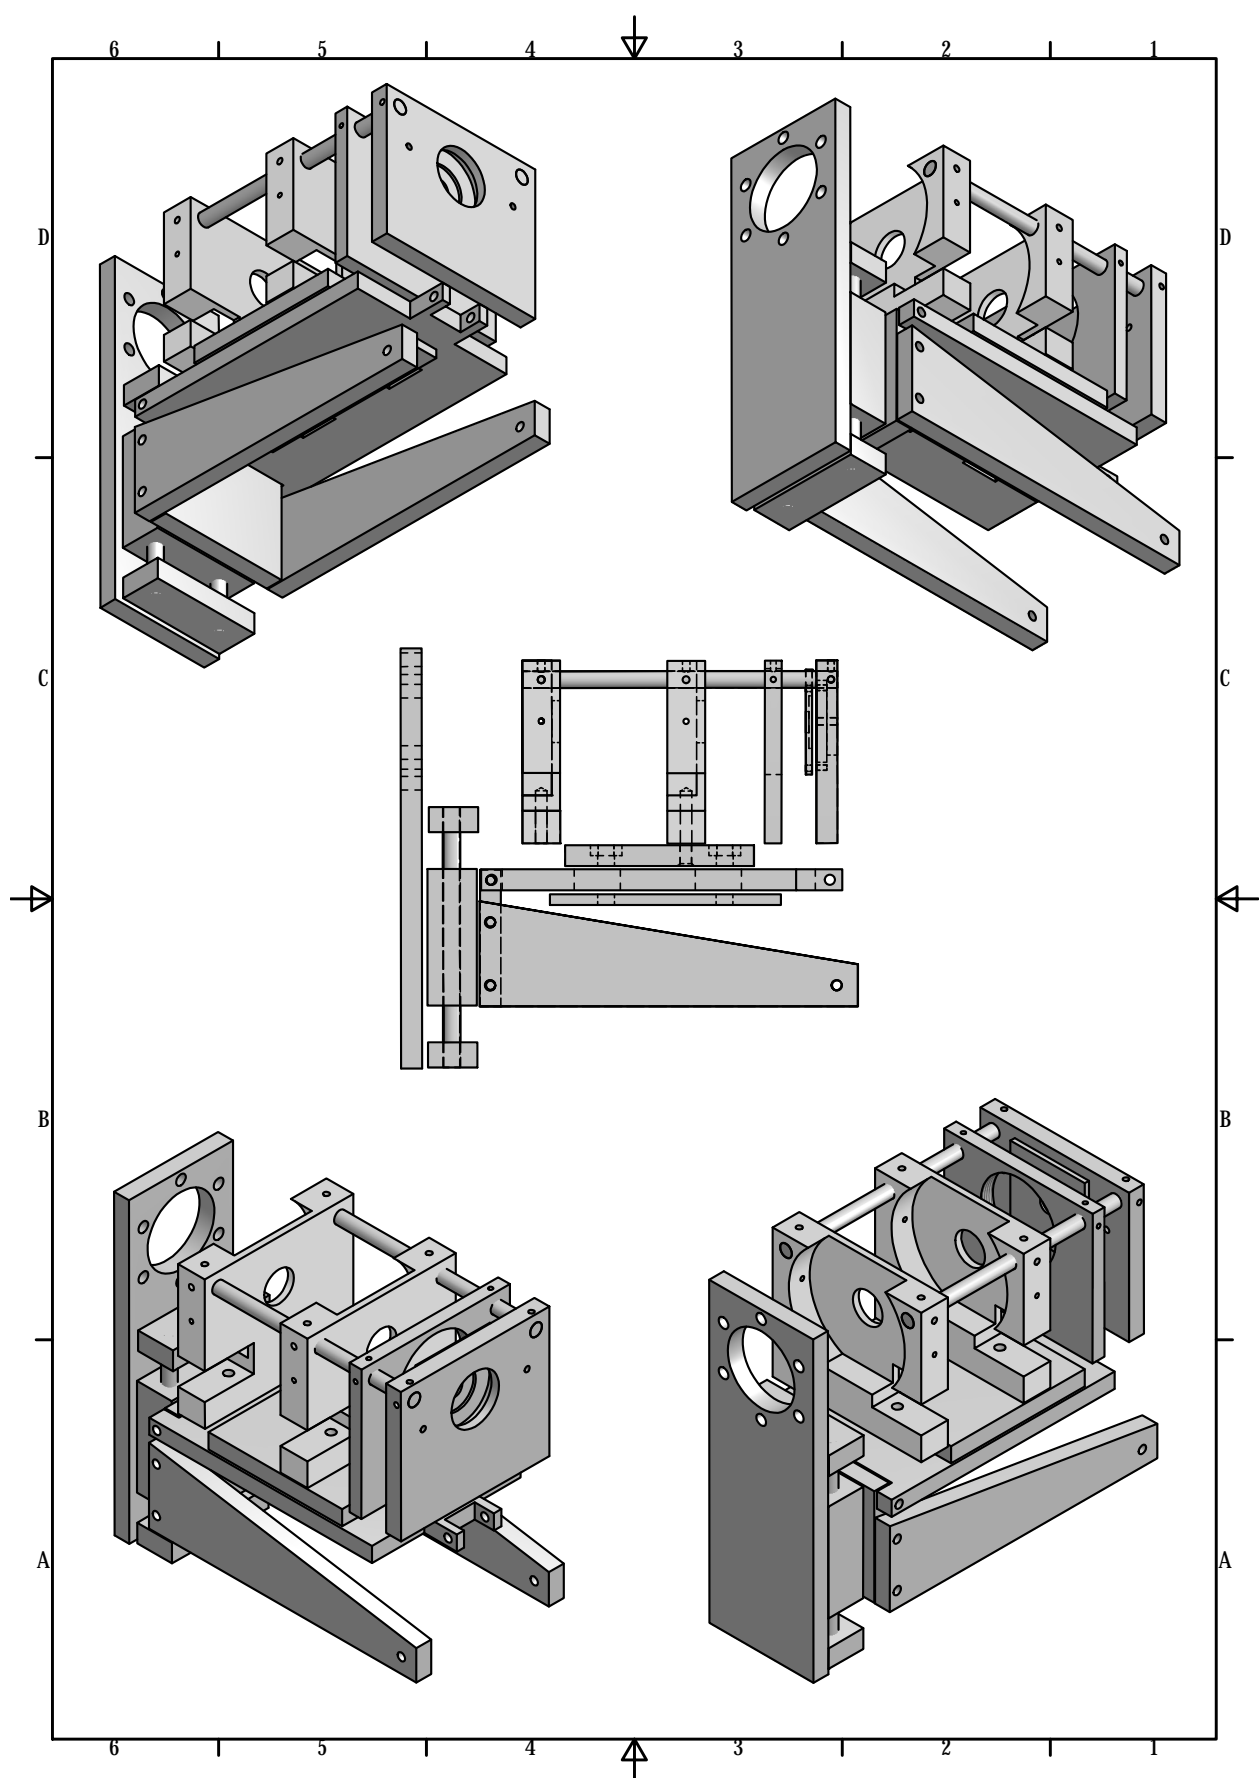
Detector assembly. The technical drawings of the single parts are presented on the following pages.
